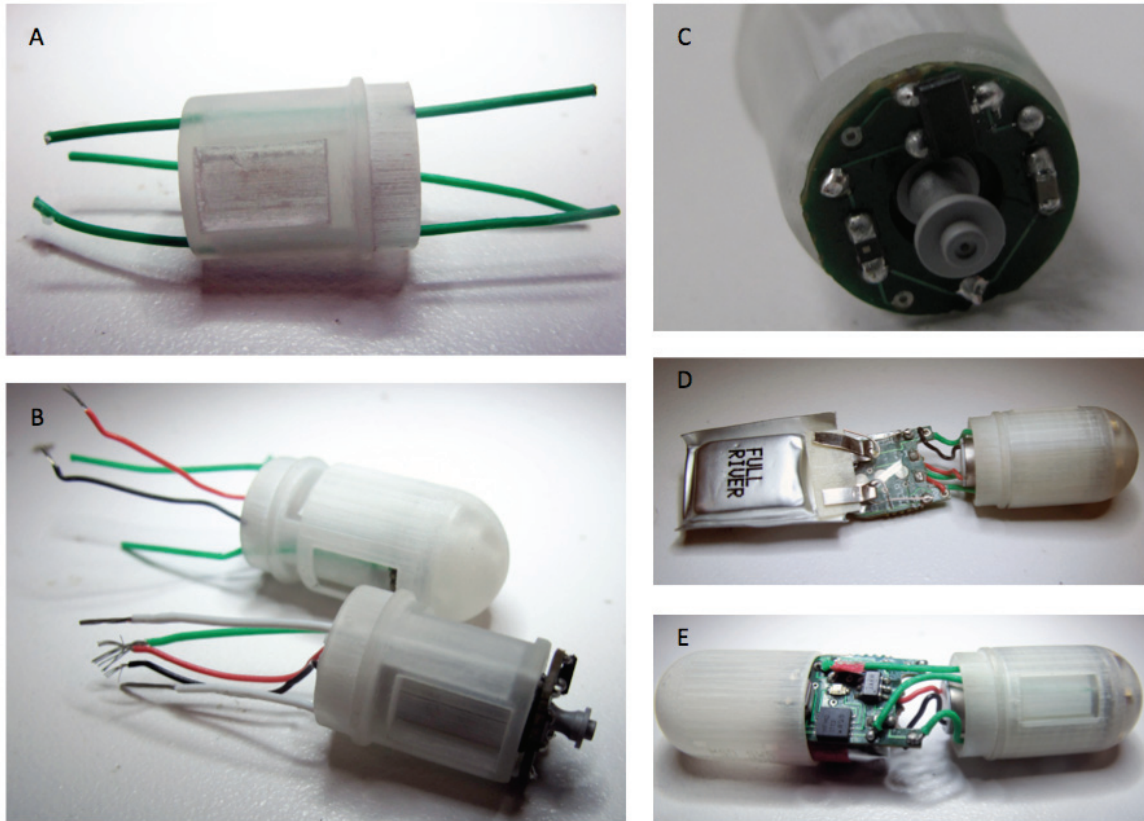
Assembly of GI sampling device (Embodiment A) a) insertion of wires into the sampling body conduits, b) fitting of motor into central portion c) attachment of magnetic encoder annular PCB d) magnet fitting and battery connection e) external shell assembly
